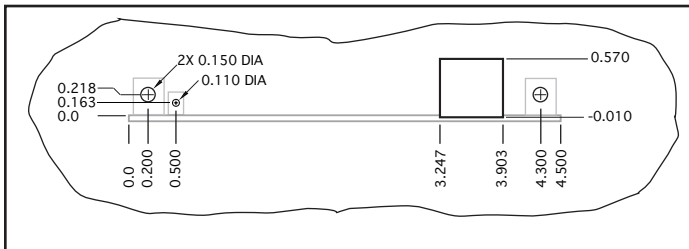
8003 Rear Panel Mounting Dimensions.
